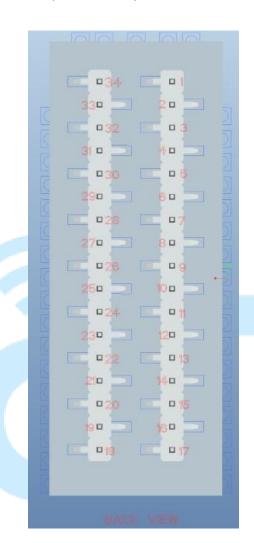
GL6509 SMT Type Recommend PCB Footprint.
